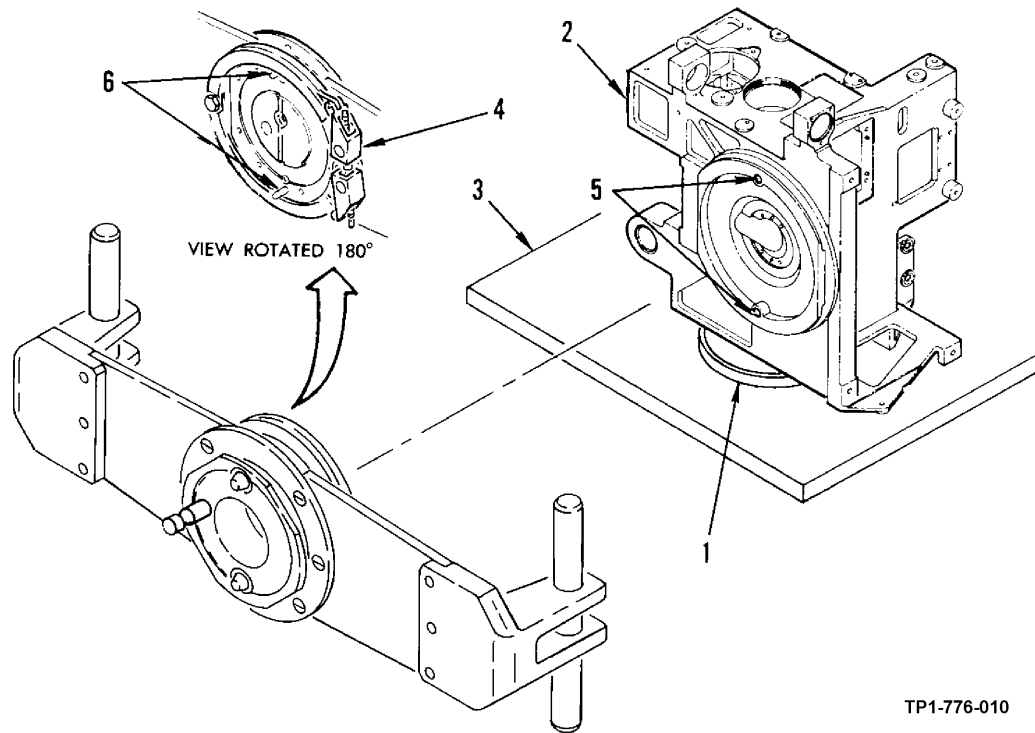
Day Sensor Subassembly Removal from Base Assembly
